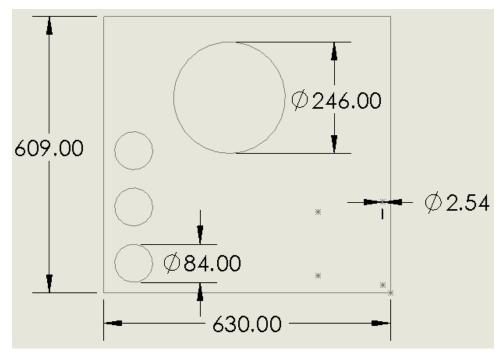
Drawing of mounting template with footprint and diameter dimensions shown in units of millimeters.
